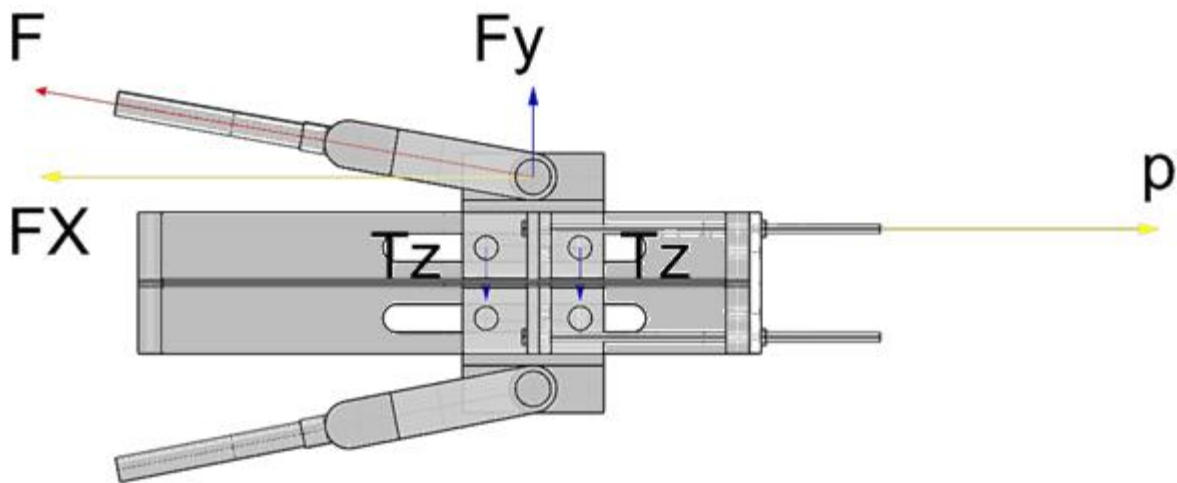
Equilibrium for Hoop and Cable connection - front view , top part
